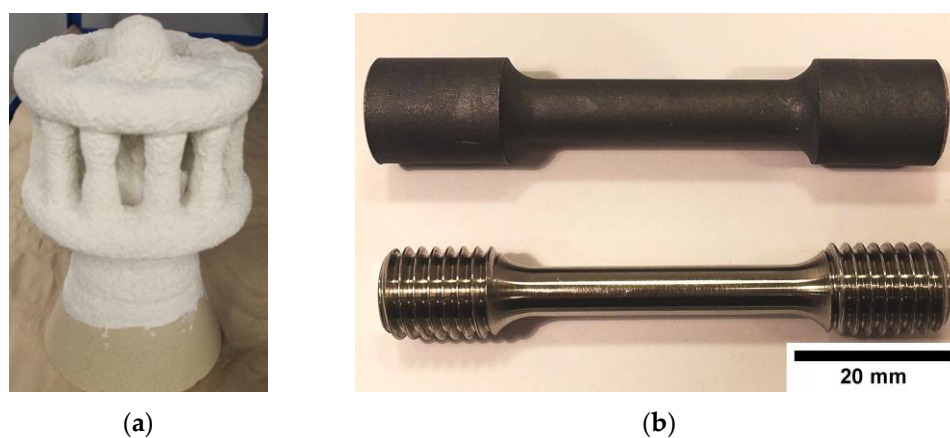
(a) Prepared shell mold; (b) casting geometry and machined sample for mechanical property testing.
